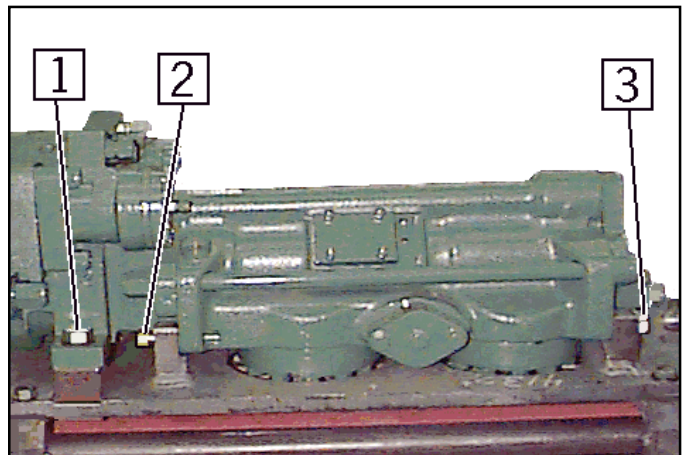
HPR3818 (HPR1H-ATW) Drill Mounting Bolts
